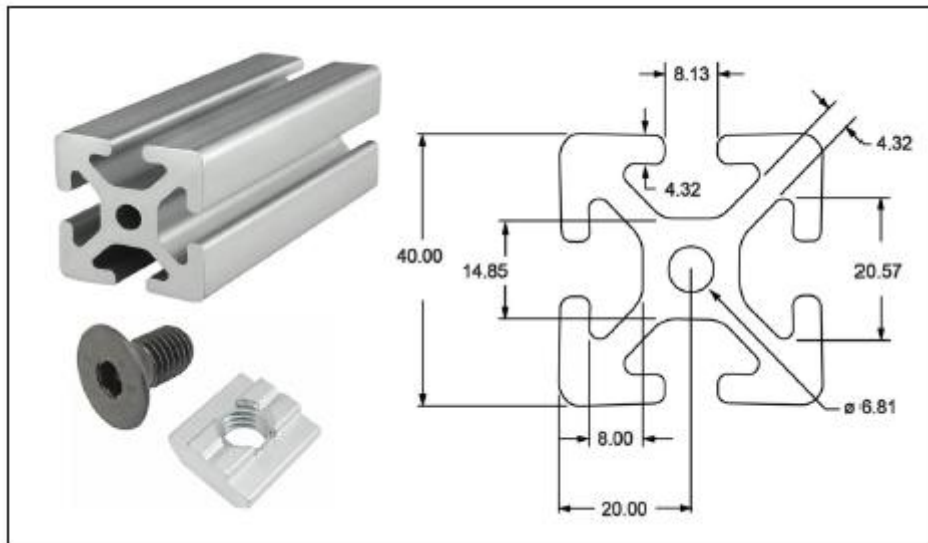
Payload mount extrusion, dimensions in mm and T-Nut
